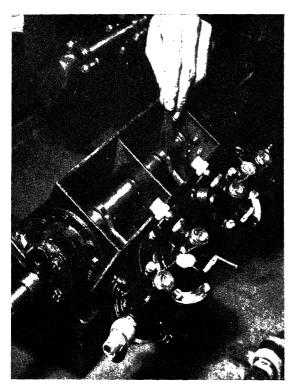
There should be 0.035 to 0.045 in. Further move-MENT BETWEEN STRIKING PAD AND ECCENTRIC IN FULL LIFT POSITION.
